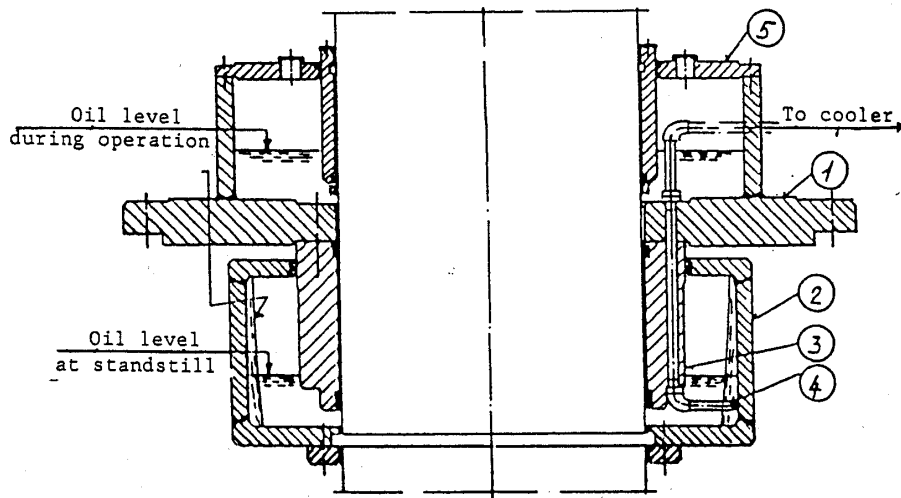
Rotating parts. Including lower rotating oil reservoir of turbine bearing.
